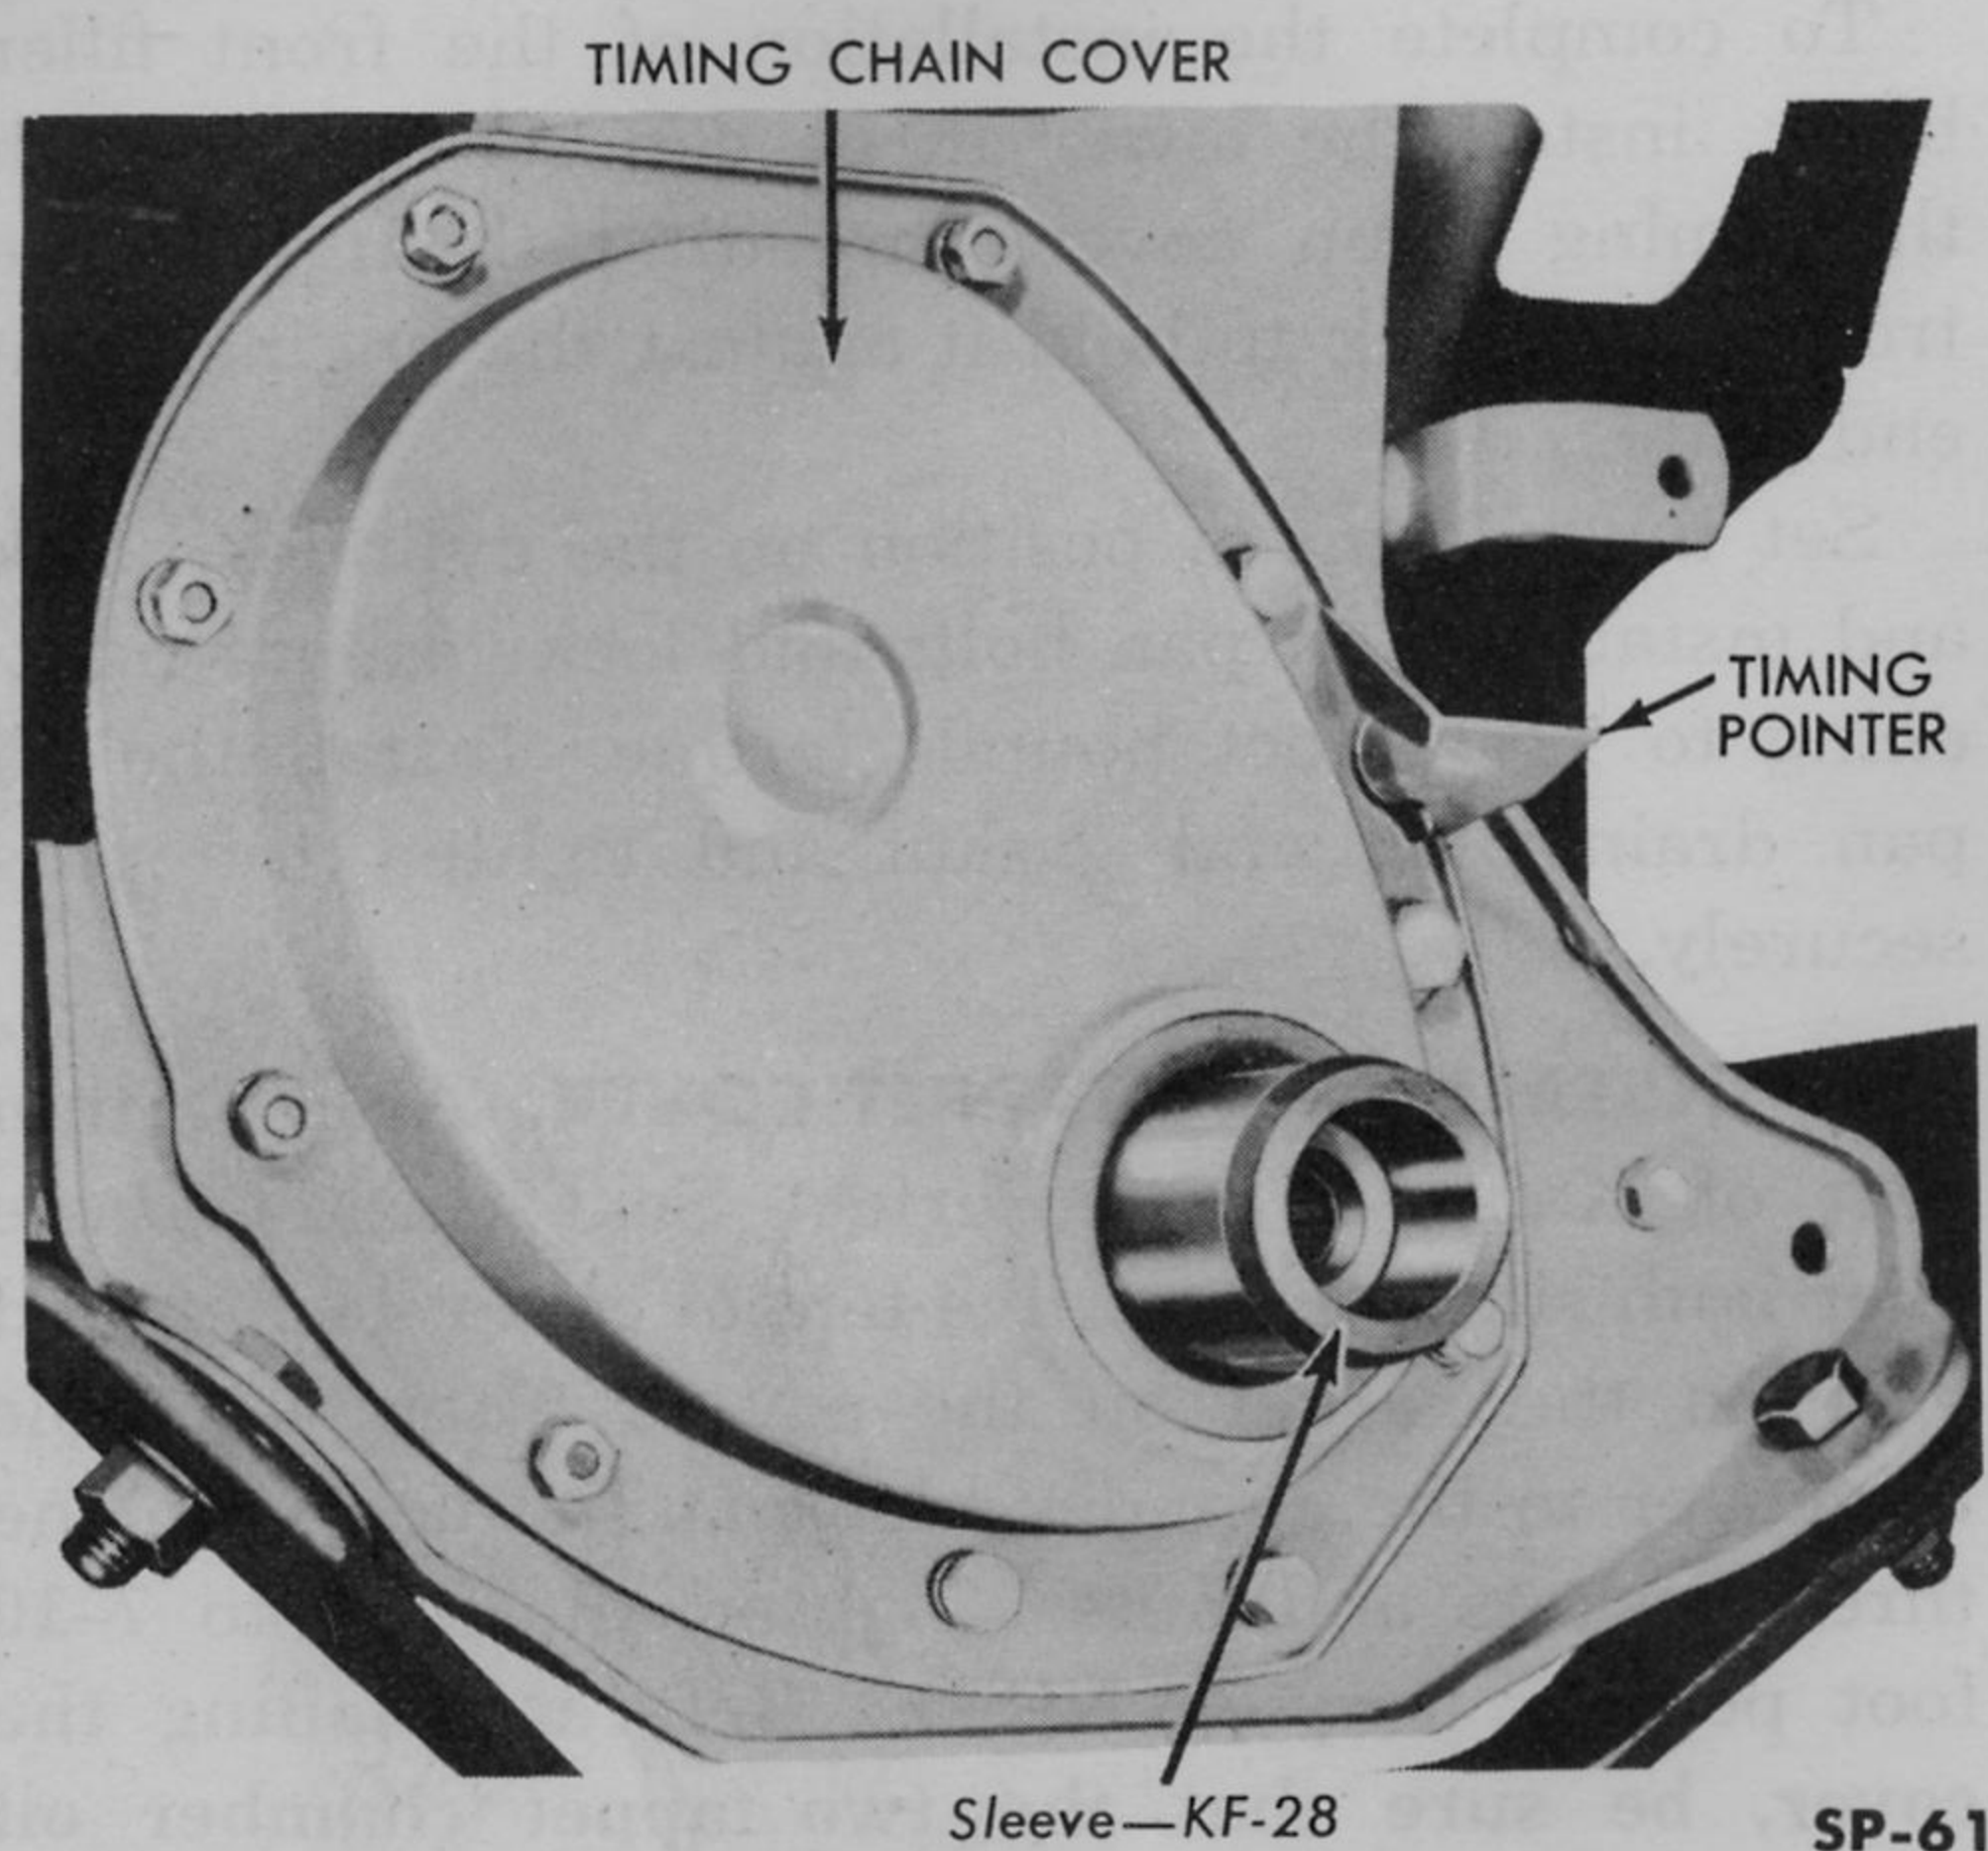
Installing Timing Chain Cover and Pointer—Frazer
